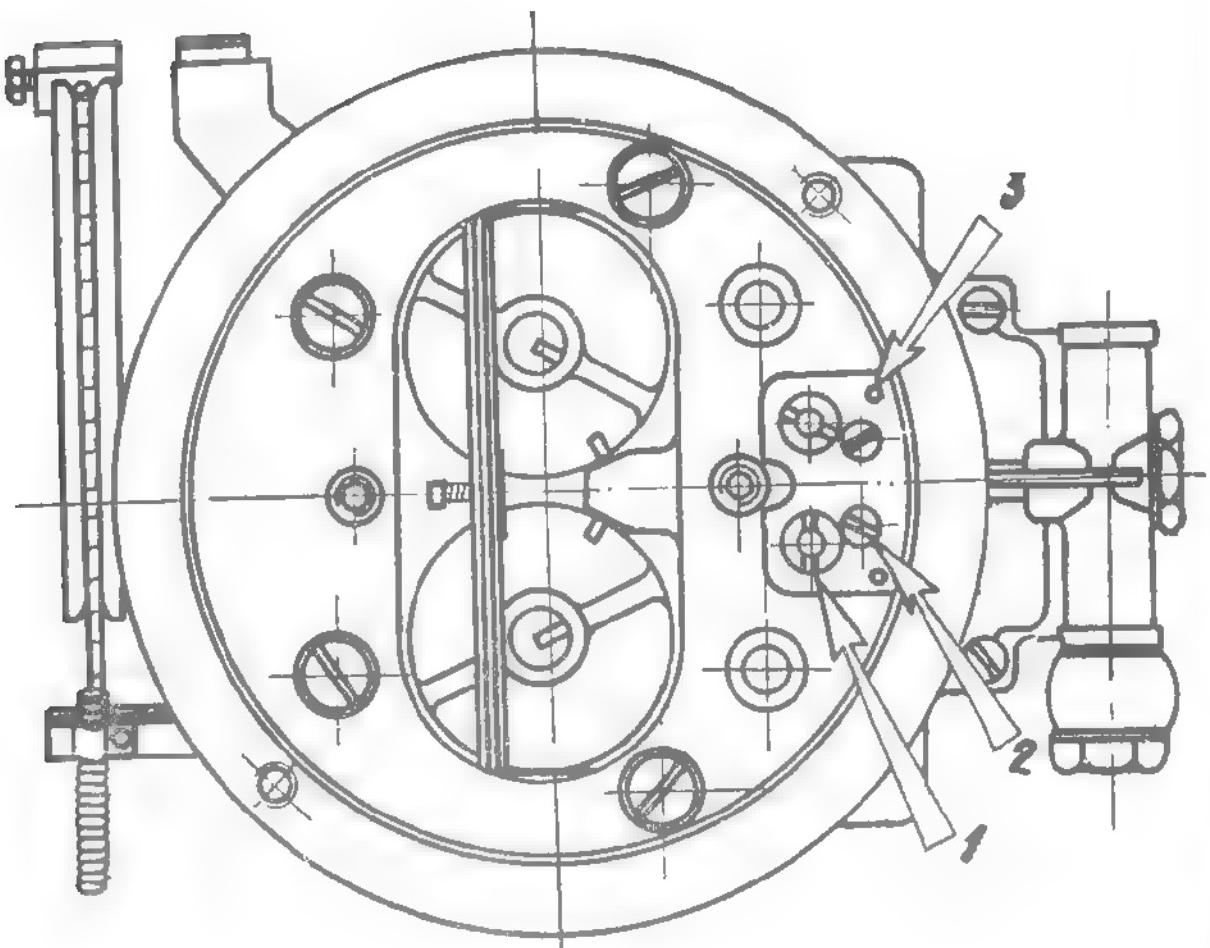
ACCESS TO CARBURETTOR JETS
